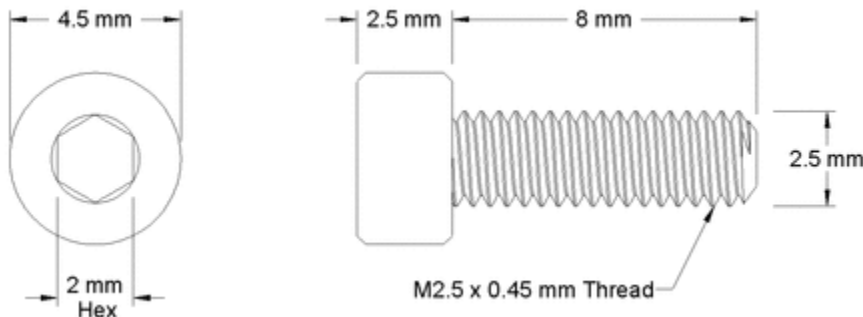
Type 316 Stainless Steel Socket Head Cap Screw used to join our plates.
